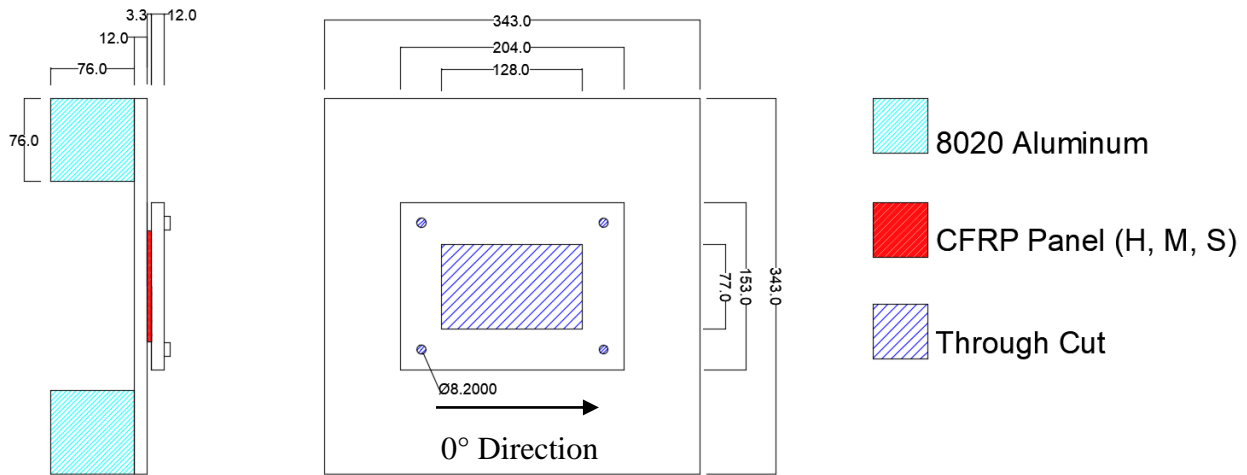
Schematic Drawing of Pendulum Impactor Constraints, all dimensions in mm
